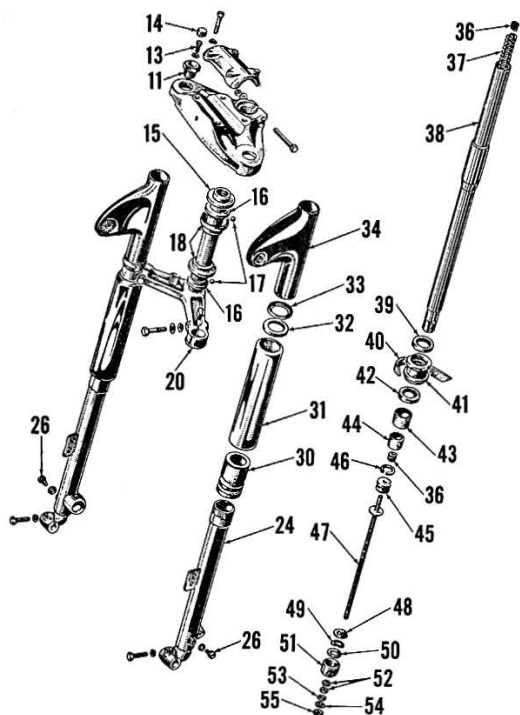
Exploded view of Sport 60, Saber and Cheyenne front suspension assembly.
